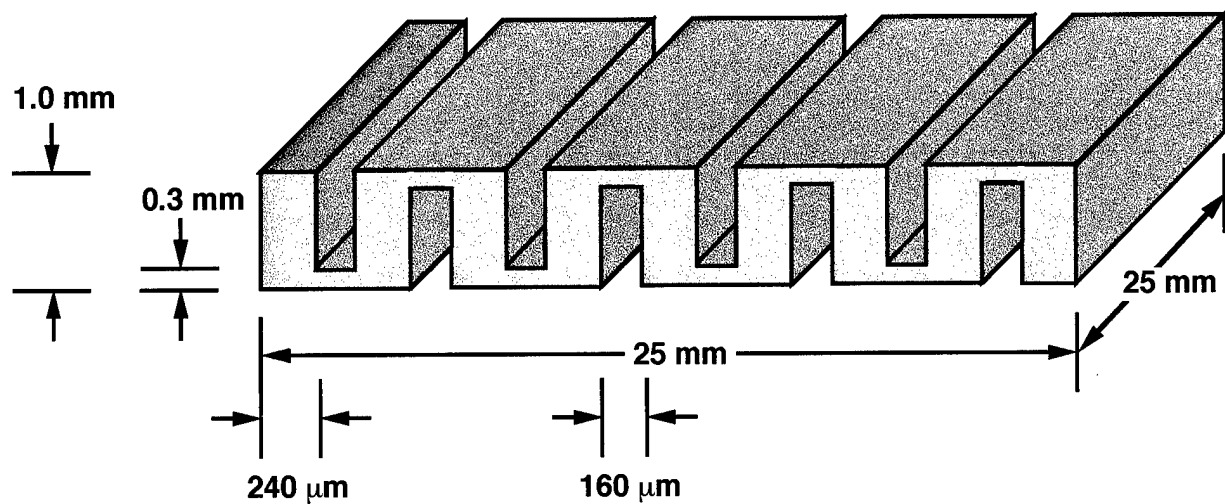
Schematic representation of serpentine PZT actuator showing typical dimensions.
